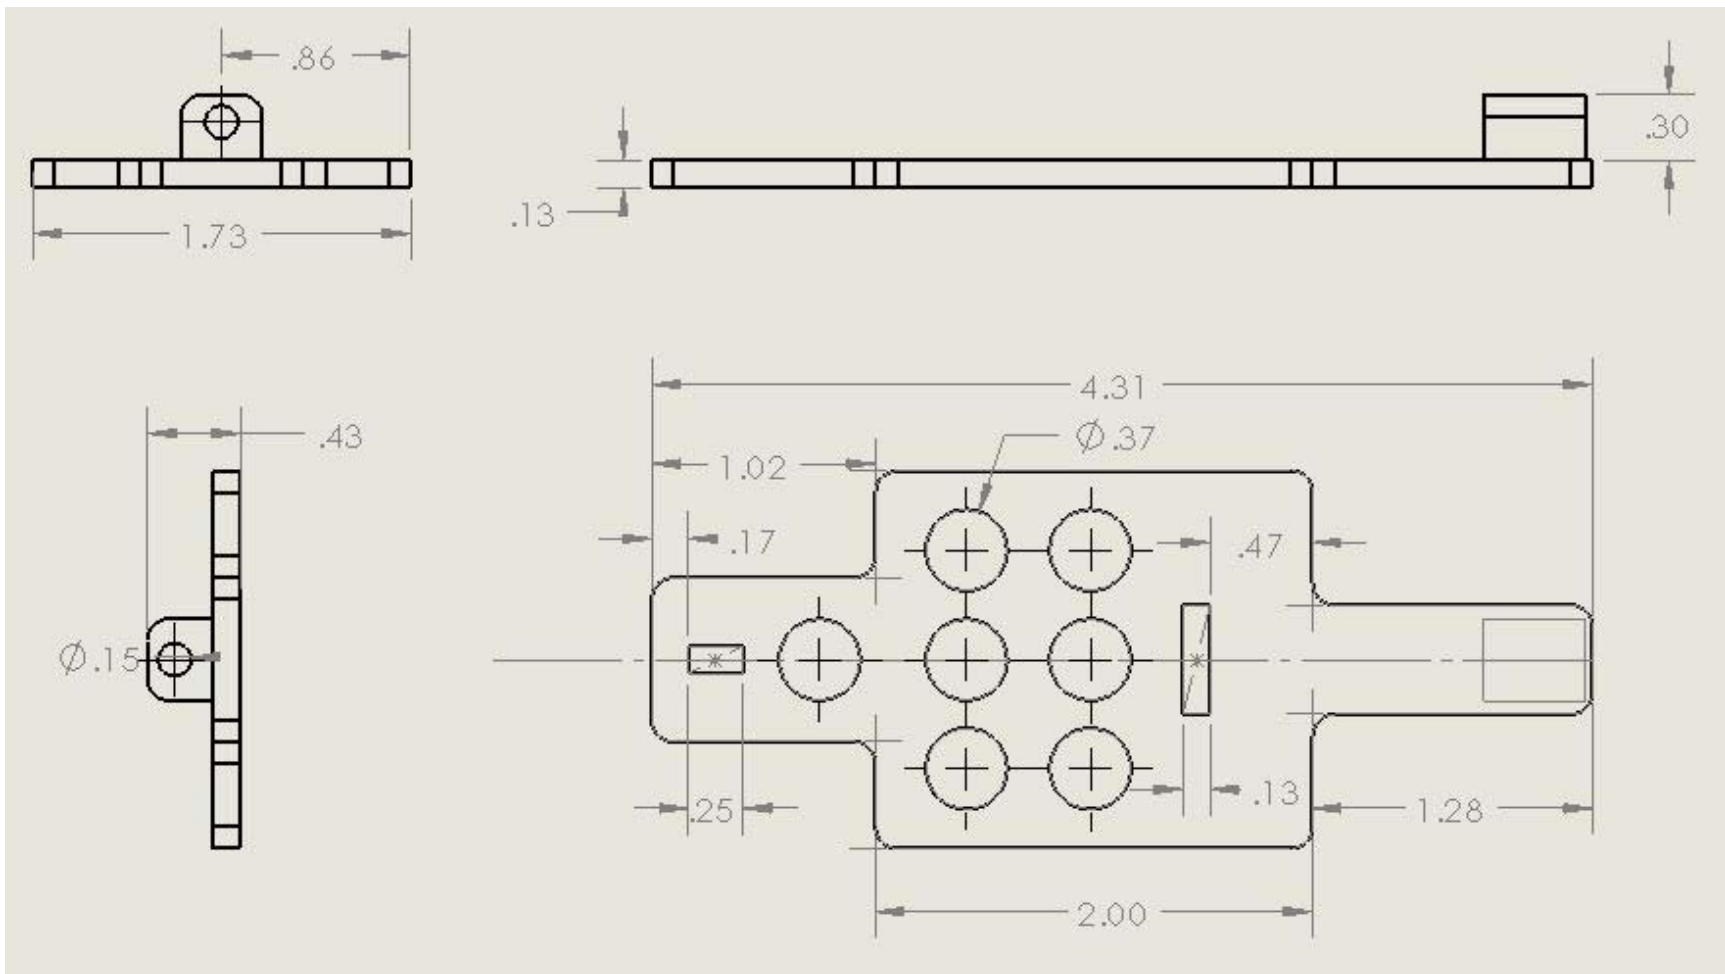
Detailed Drawing of the Release Mechanism Mounting Plate.
